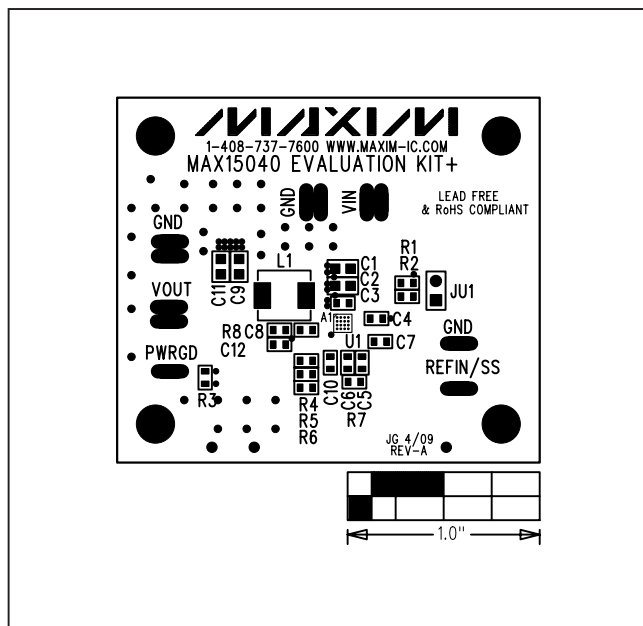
MAX15040 EV Kit Component Placement Guide—Component Side
